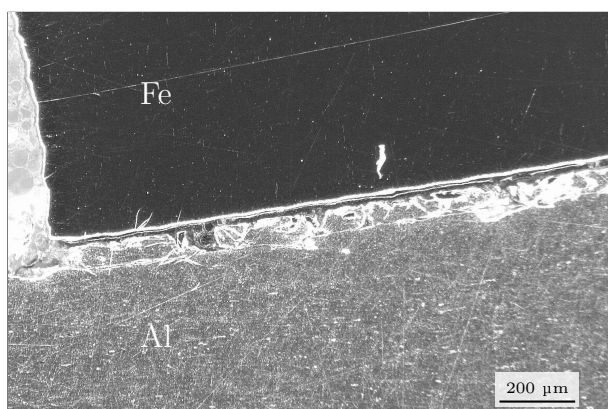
Macrograph of the WCZ of the lightweight gear wheel showing the separation on the inside
